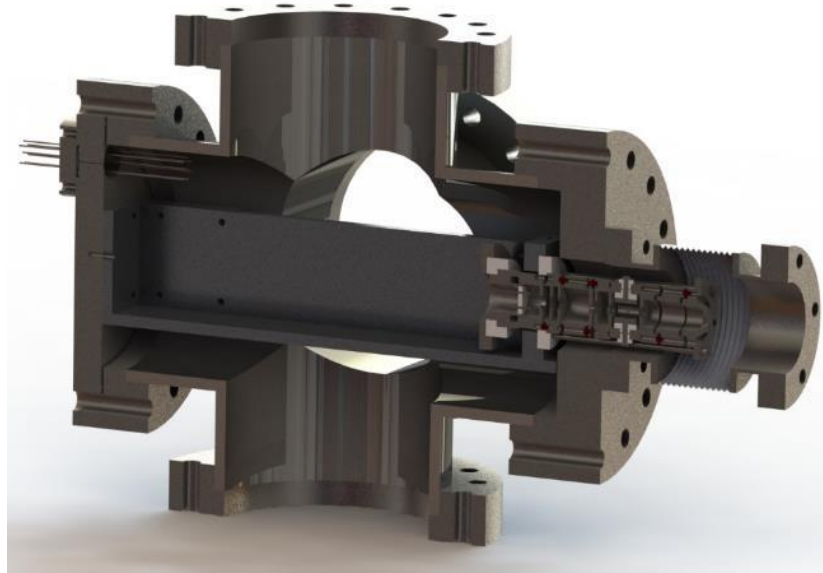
Cross section view of 3D model of differential turbo pumping vacuum stage assembly with the electron gun, based on a six-way CF100 cross.
